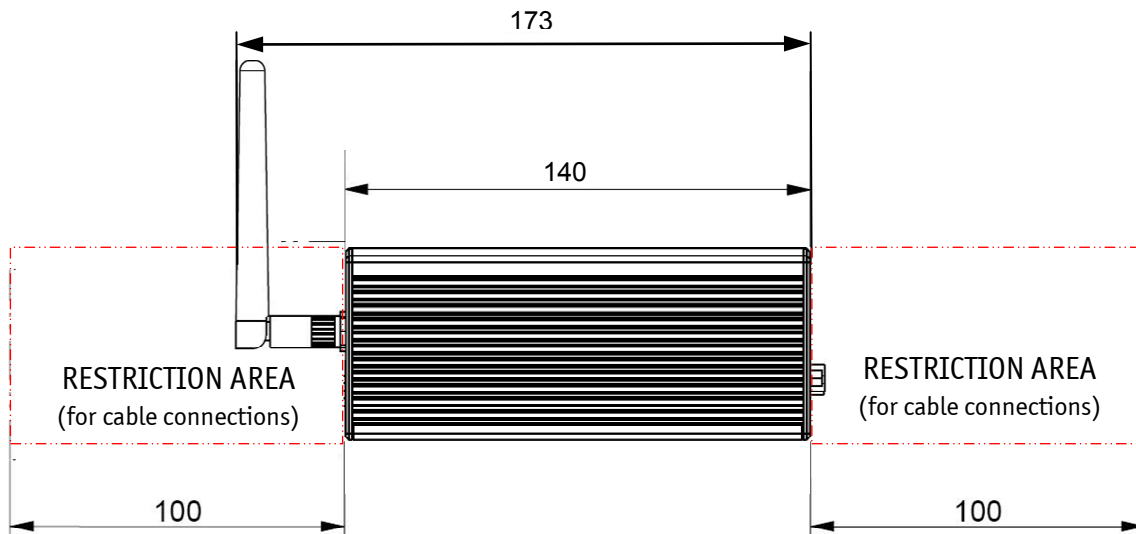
Dimensions in side view (by use of the DIN Rail clip)
